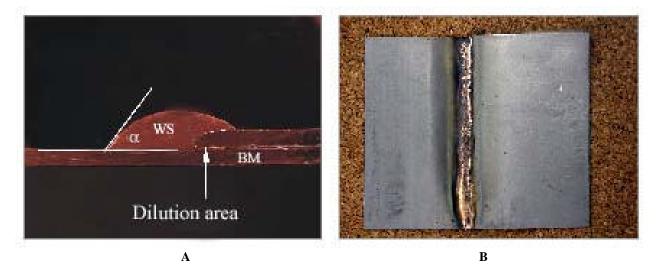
A) Details of fillet welded joint shows weld metal, base metal, convexity angle ( $\alpha$ ) and dilution area. B) Detail of top view of filet welded joint
